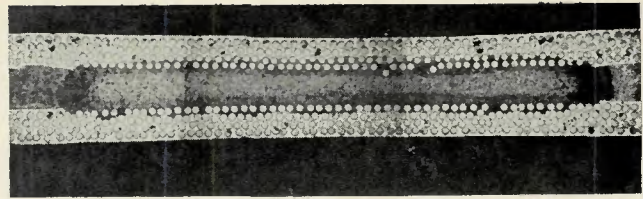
Spot weld cross section 20 mil Al-B to 20 mil 2024-T3 Al to 20 mil Al-B. High weld and forge pressure resulted in 10% indentation, some distortion at the edge of the nugget and only about 30% penetration. X18 (reduced 23% on reproduction)
